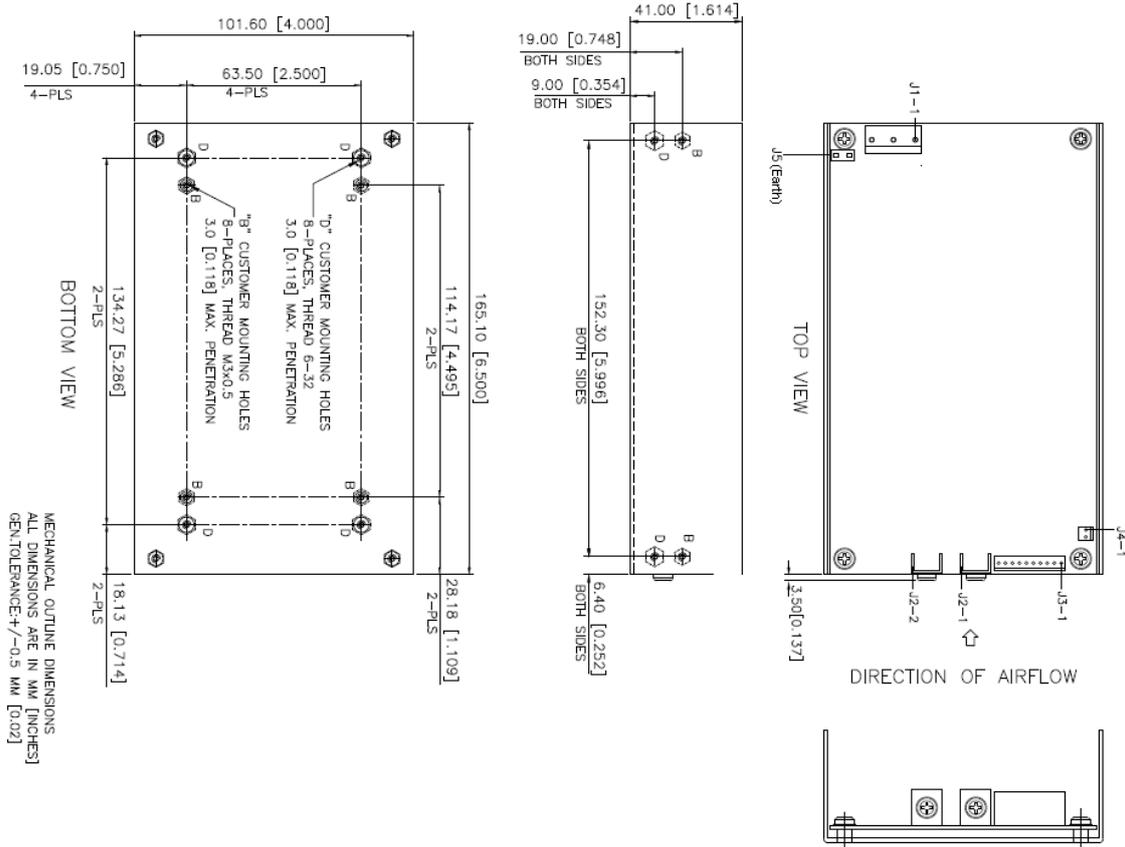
Dimensions Drawing (With Top Fan Mounting)
